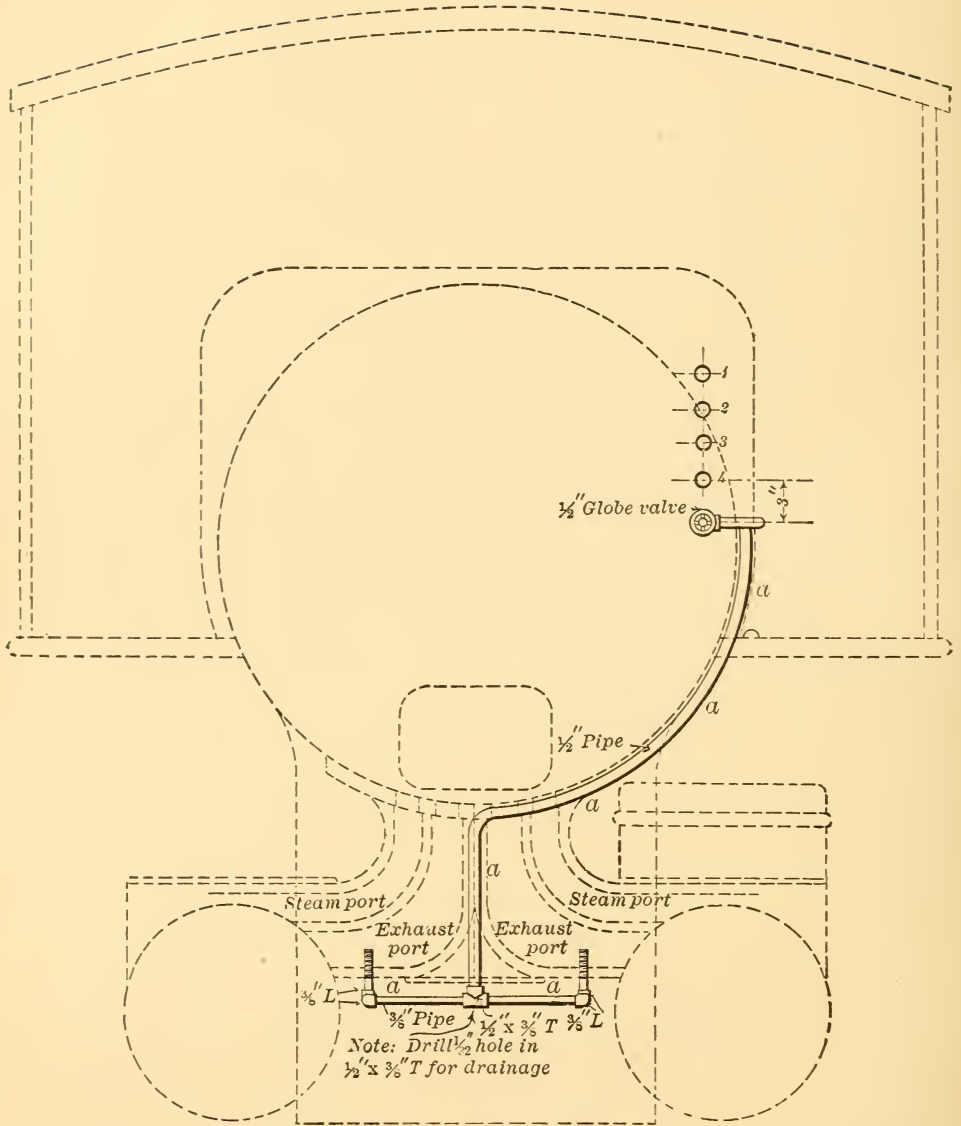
WATER BRAKE ON SIMPLE ENGINE.
